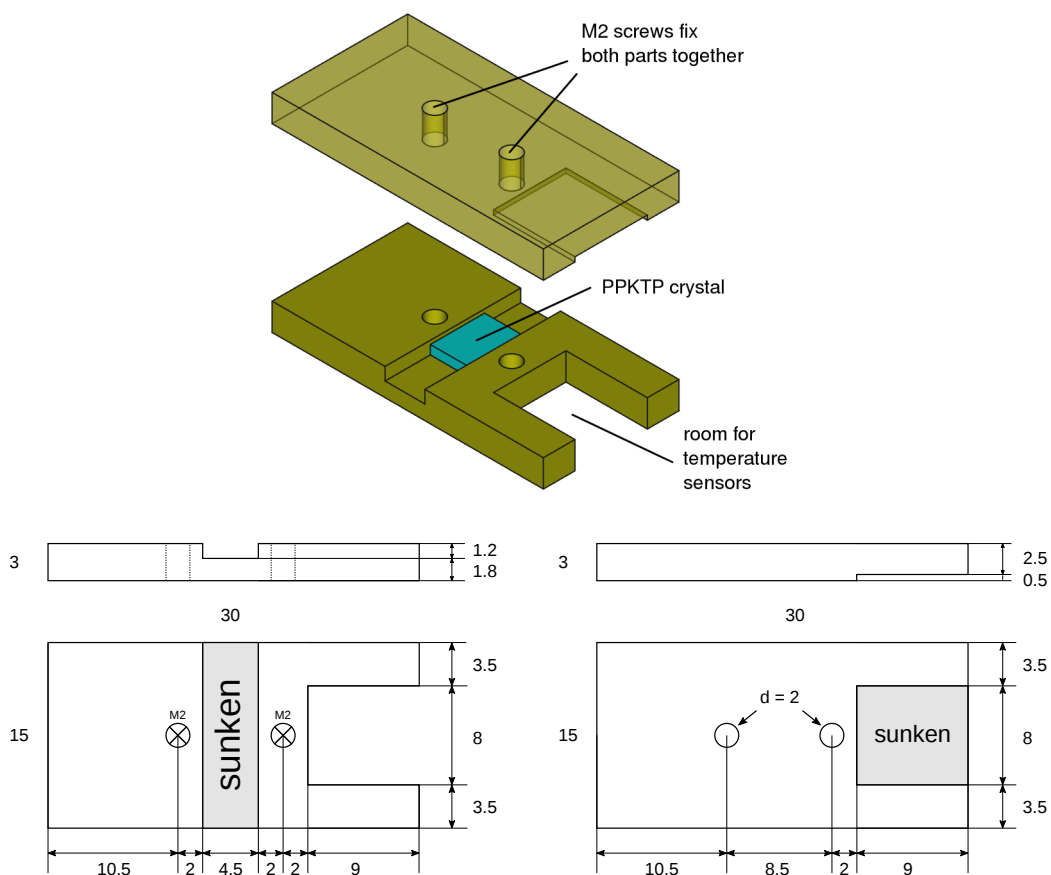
Brass crystal housing. The top image shows an orthographic projection of both parts; the lower schematics show side and top views of both parts with specified dimensions.
